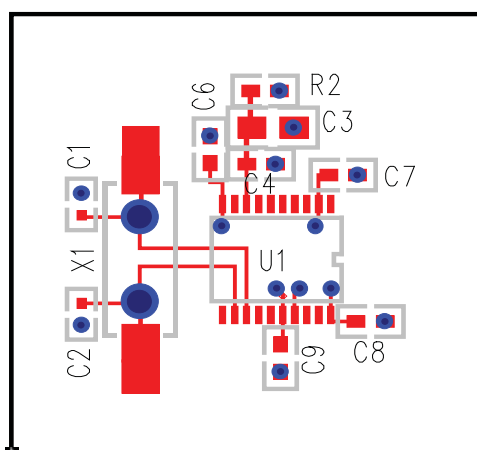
B. 843002-01 PC BOARD LAYOUT EXAMPLE
